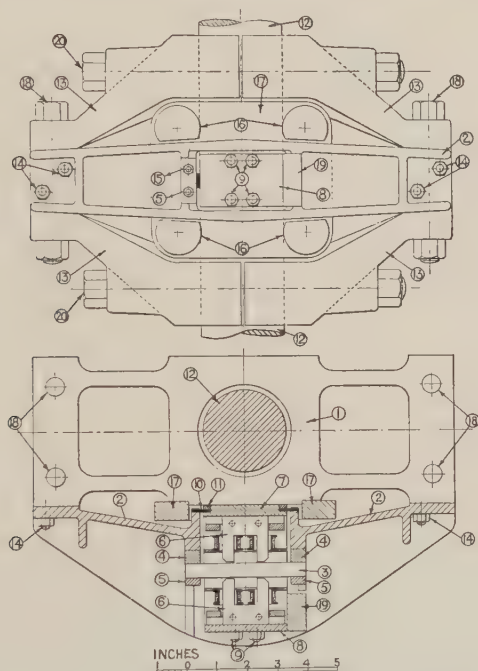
Complete load-gauge. Above: inverted plan. Below: part section with supporting brackets 13 removed.
